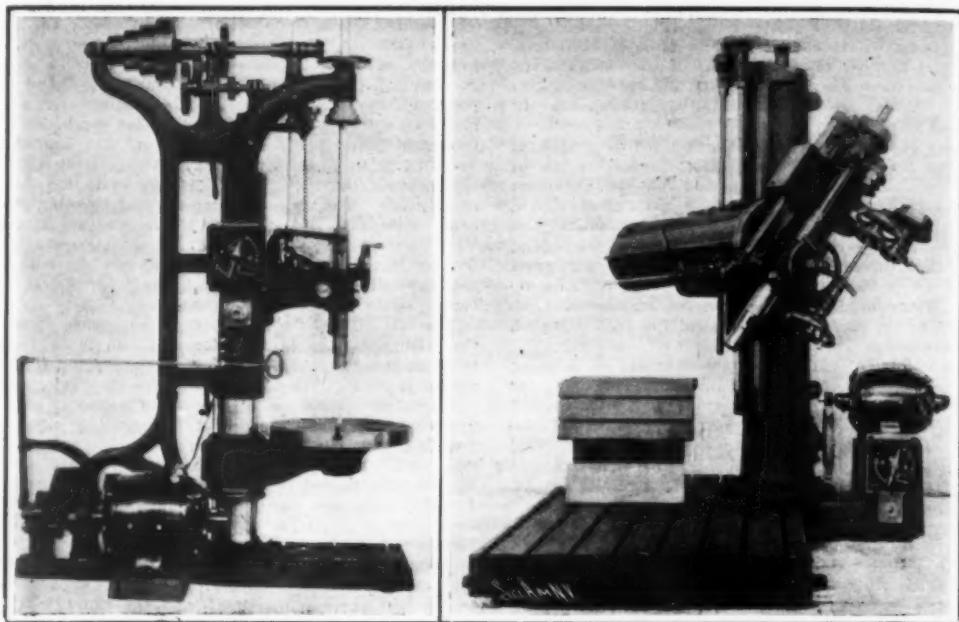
RADIAL DRILL AND UNIVERSAL RADIAL DRILL DRIVEN BY 2 AND 3-HORSE-POWER MOTORS RESPECTIVELY.
